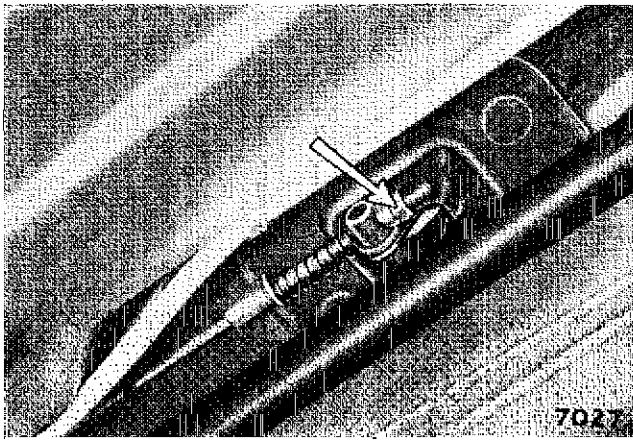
Location of the right-hand brake cable adjuster, the left-hand adjuster is on the opposite side of the handbrake lever
